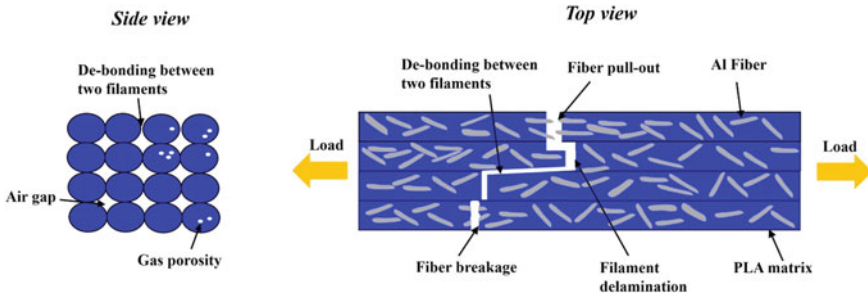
Illustration of tensile fracture mechanism of additively manufactured Al/PLA composite specimen [60]
